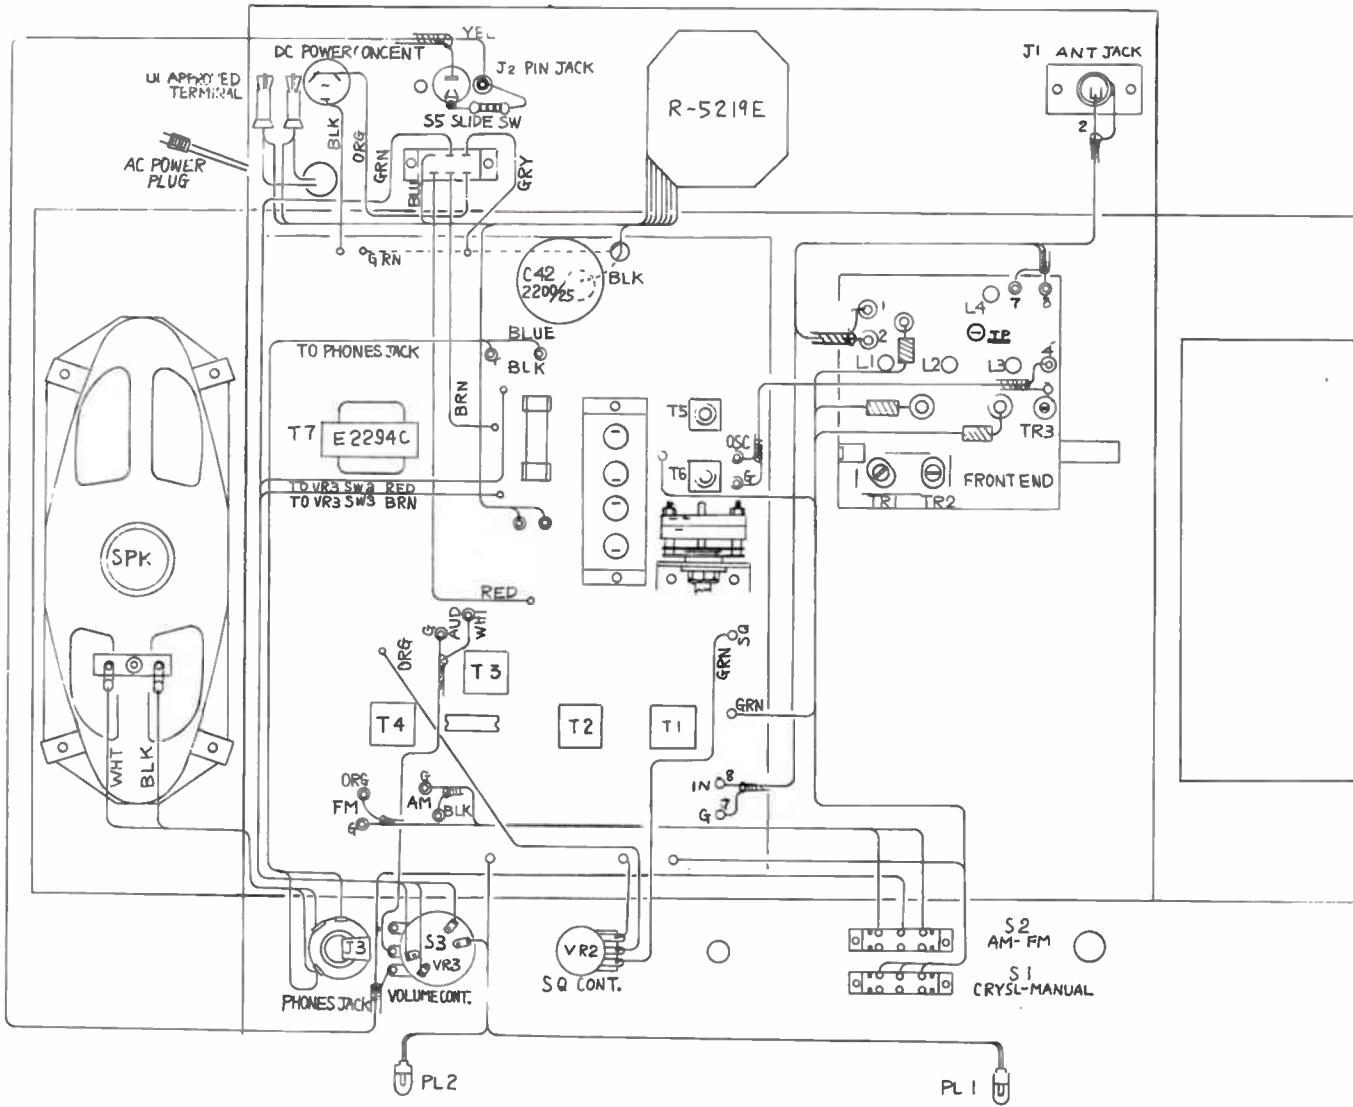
PRINTED CIRCUIT BOARD TOP VIEW FOR PRO-1
